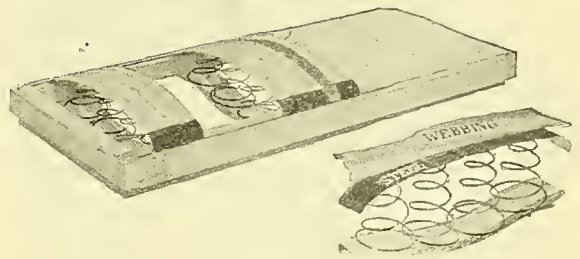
IMPROVED SECTIONAL-SPRING BACK.
